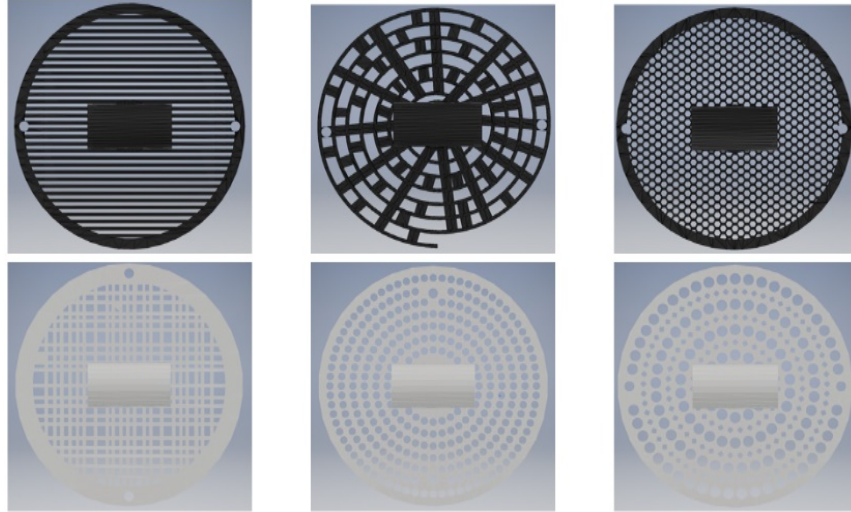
The CAD designs for multiple stacks. The designs included parallel plates, circular holes, and honeycomb.
